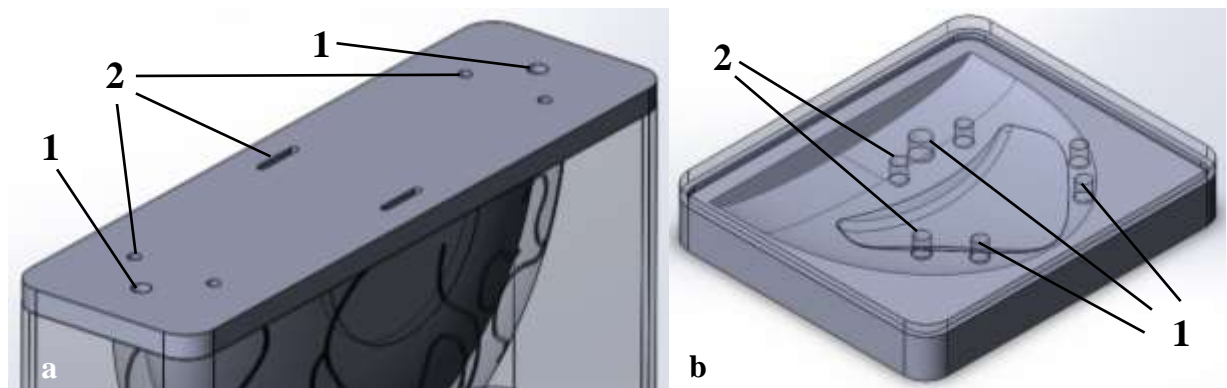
Top master of a mould setup: *a* – for adipose layer components; *b* – for fibro-glandular components; 1 – inlets to feed in the epoxy resin mixture, 2 – outlets to let excessive epoxy resin mixture flow out (marking complete filling of the mould)
